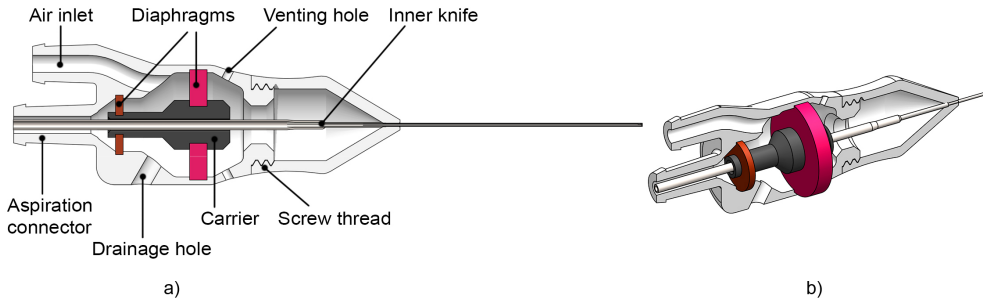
Design of the non-assembly vitrectome. a) Cross-section showing the various components of the design. b) Half cross-section showing the full dual diaphragm mechanism. Diameter outer knife 0.4 mm, length outer knife 28 mm, length entire 3D printed vitrectome 80 mm.
